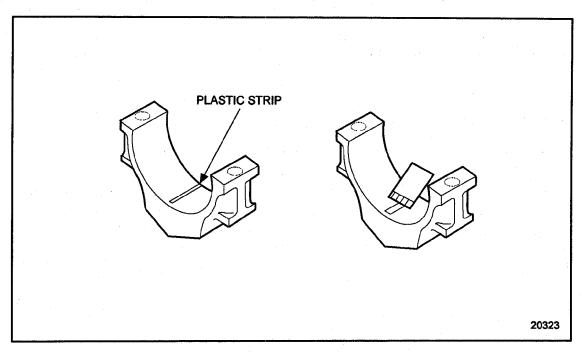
Using Plastic Strip to Measure Bearing-to-Crankshaft Clearance
